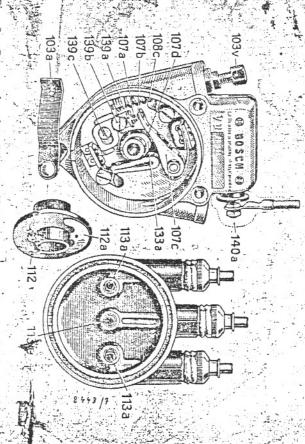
Contact breaker VU 2 D. (for twin cylinder engines) distributor disc
